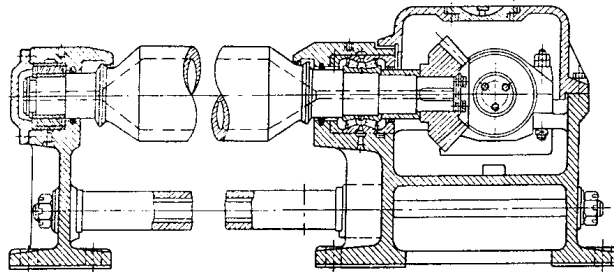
Roller conveyor with multiple drive through bevel gears
